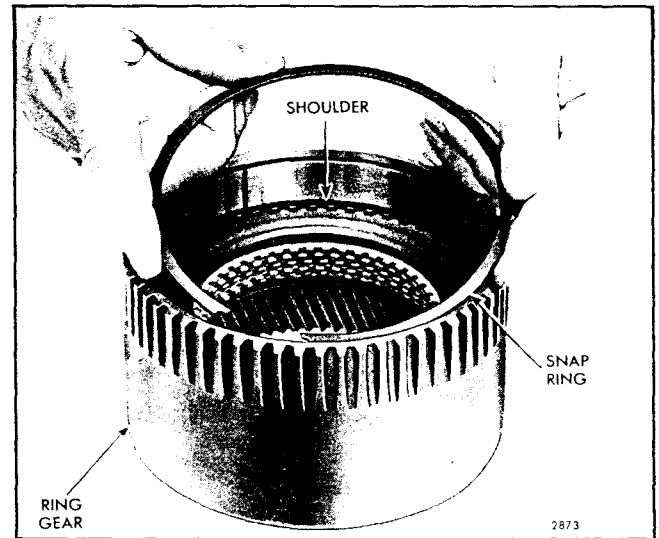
Installing Forward Clutch Pressure Plate Snap Ring in Ring Gear
